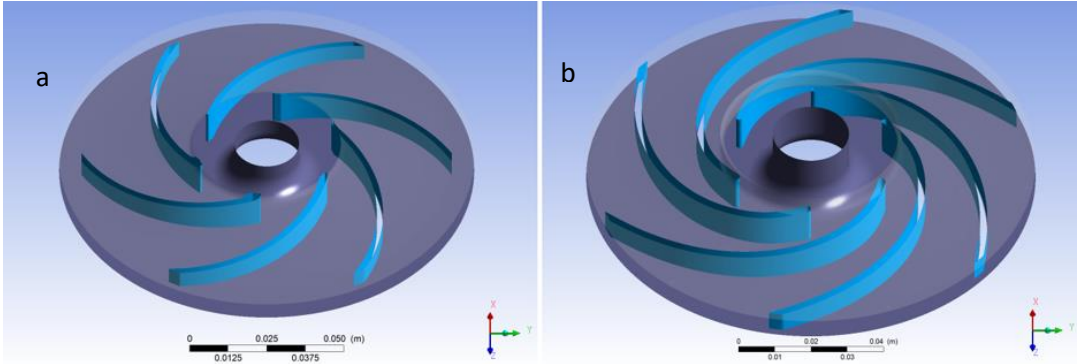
Isometric view of rotors: a) arc method, b) point method
